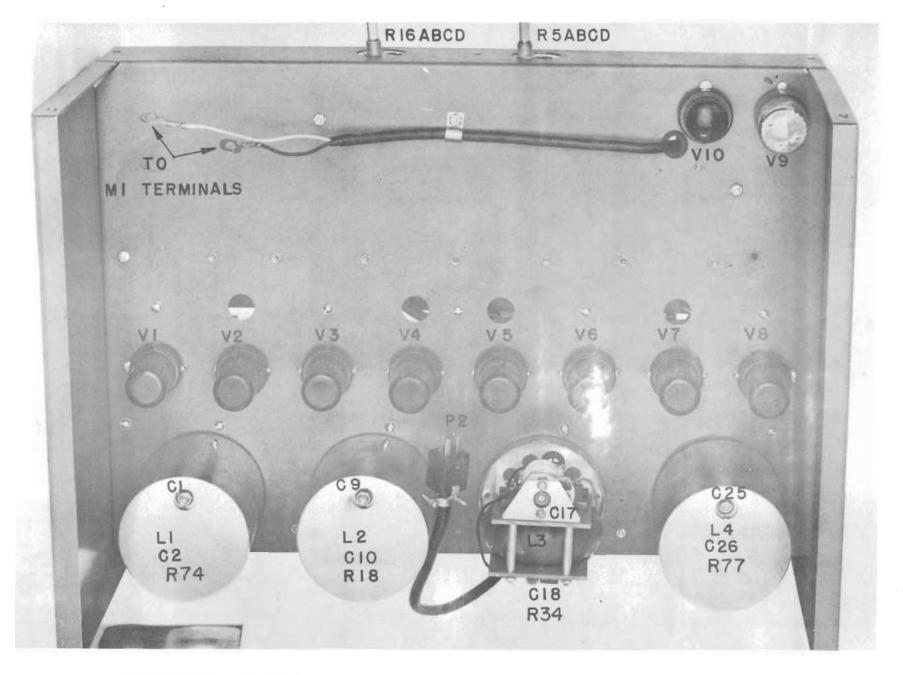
Top View of Typical Top Deck With Shield Removed to Show Details of Torroid Coil Assembly. Top Deck Separated From Control Panel.
